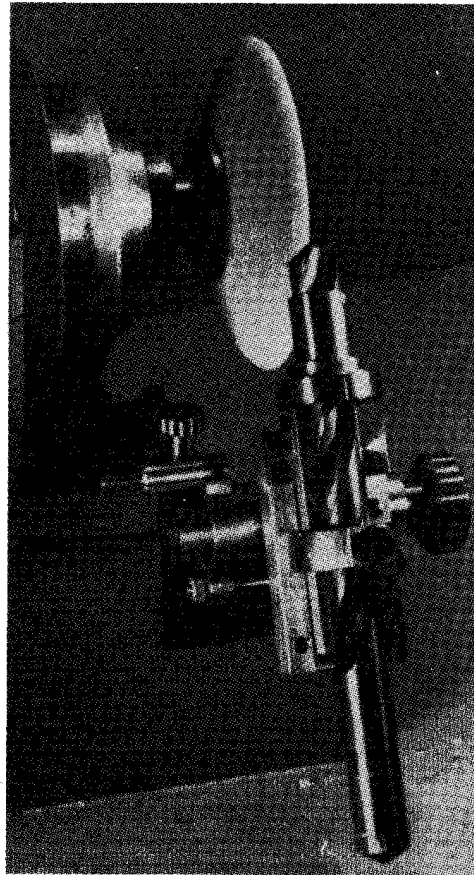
The Bradley point thinning fixture. (Courtesy Ian Bradley Esq.).
